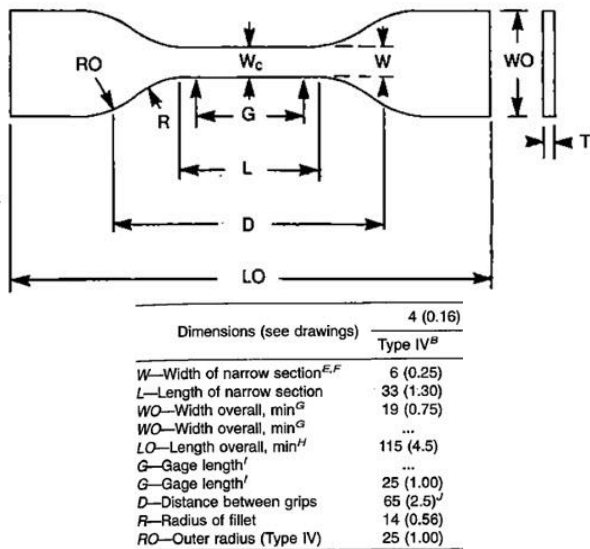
ASTM D638-10 Type IV specimen dimensions[8].
